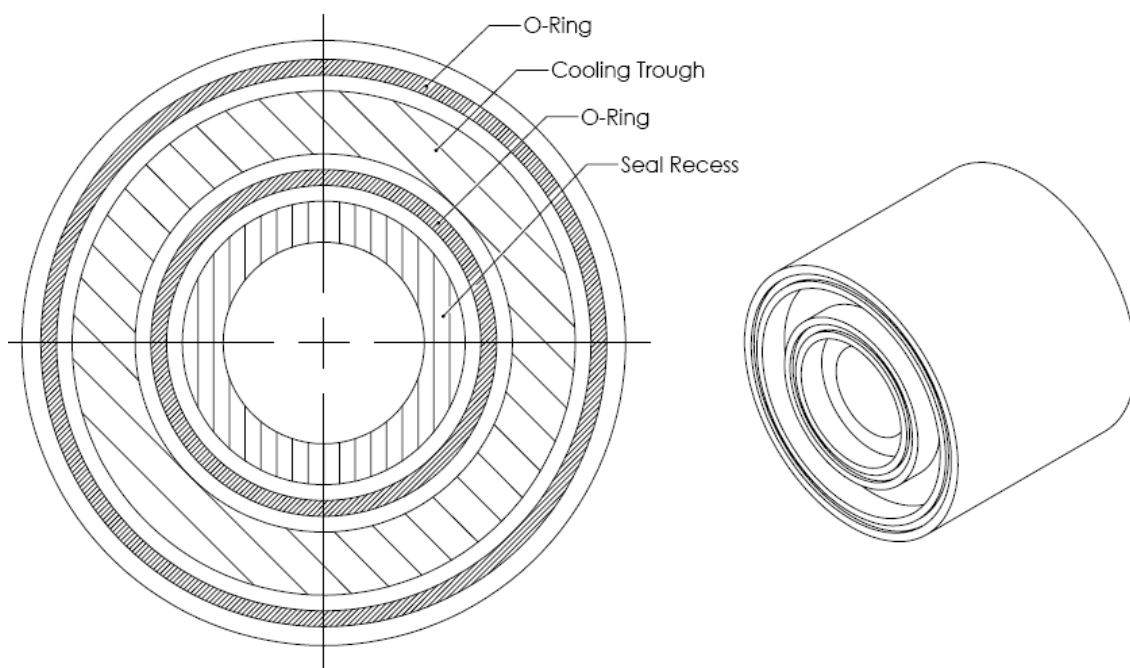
Schematic of hot-face pressure seal housing trough (left) and isometric view (right).
